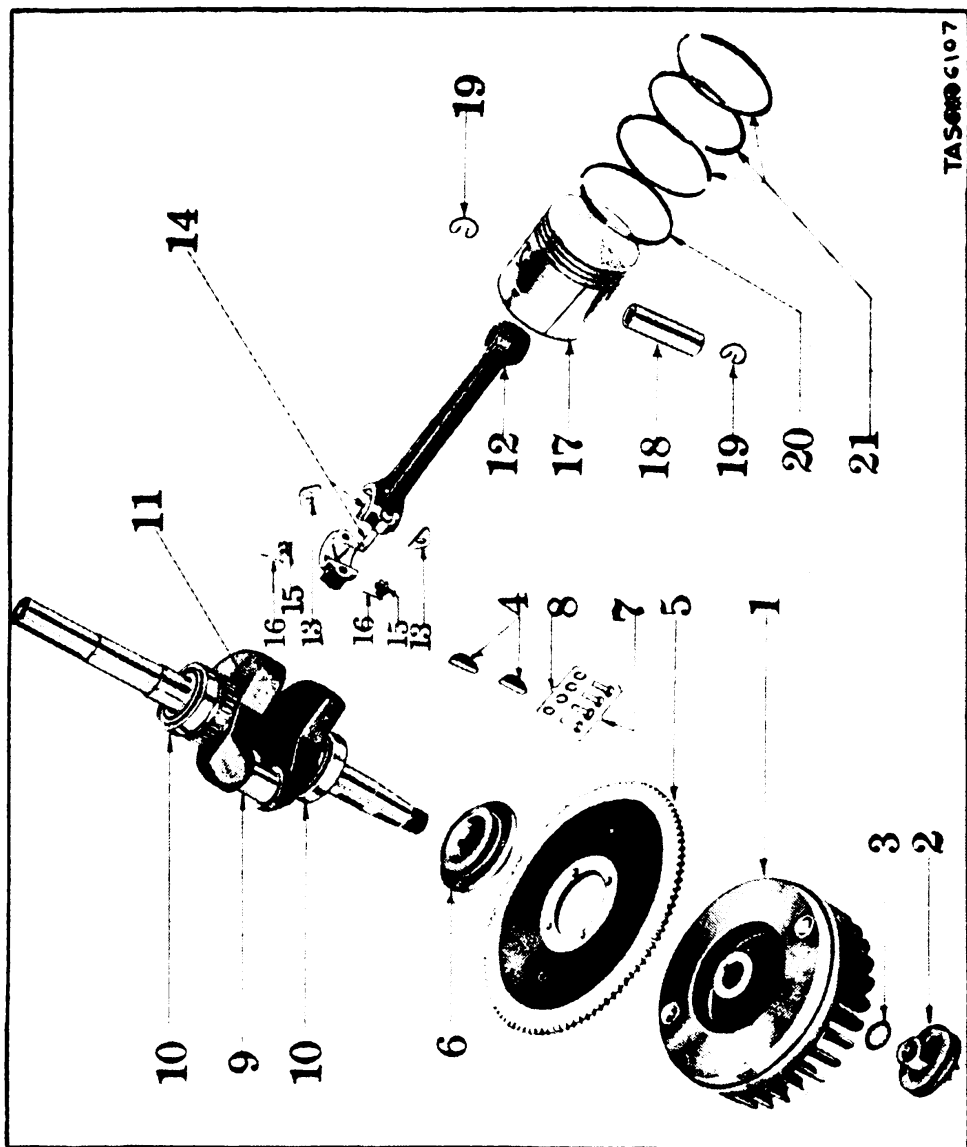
Engine Crankshaft, Connecting Rod, Piston, and Flywheel.
